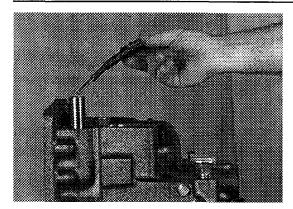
Remove modulator valve outer, middle, and inner springs and spring stop.
